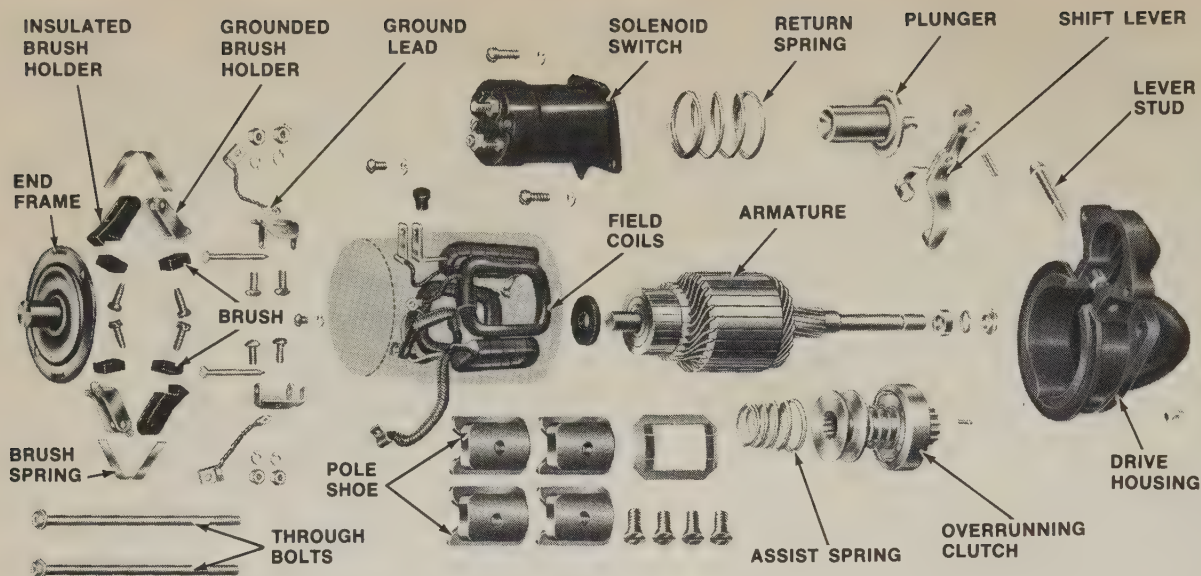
Disassembled view of a starting motor. (Delco-Remy Division of General Motors Corporation)
